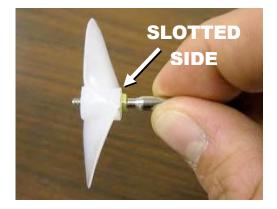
Propeller Placed Onto the Epoxy-Covered Shaft Coupler
